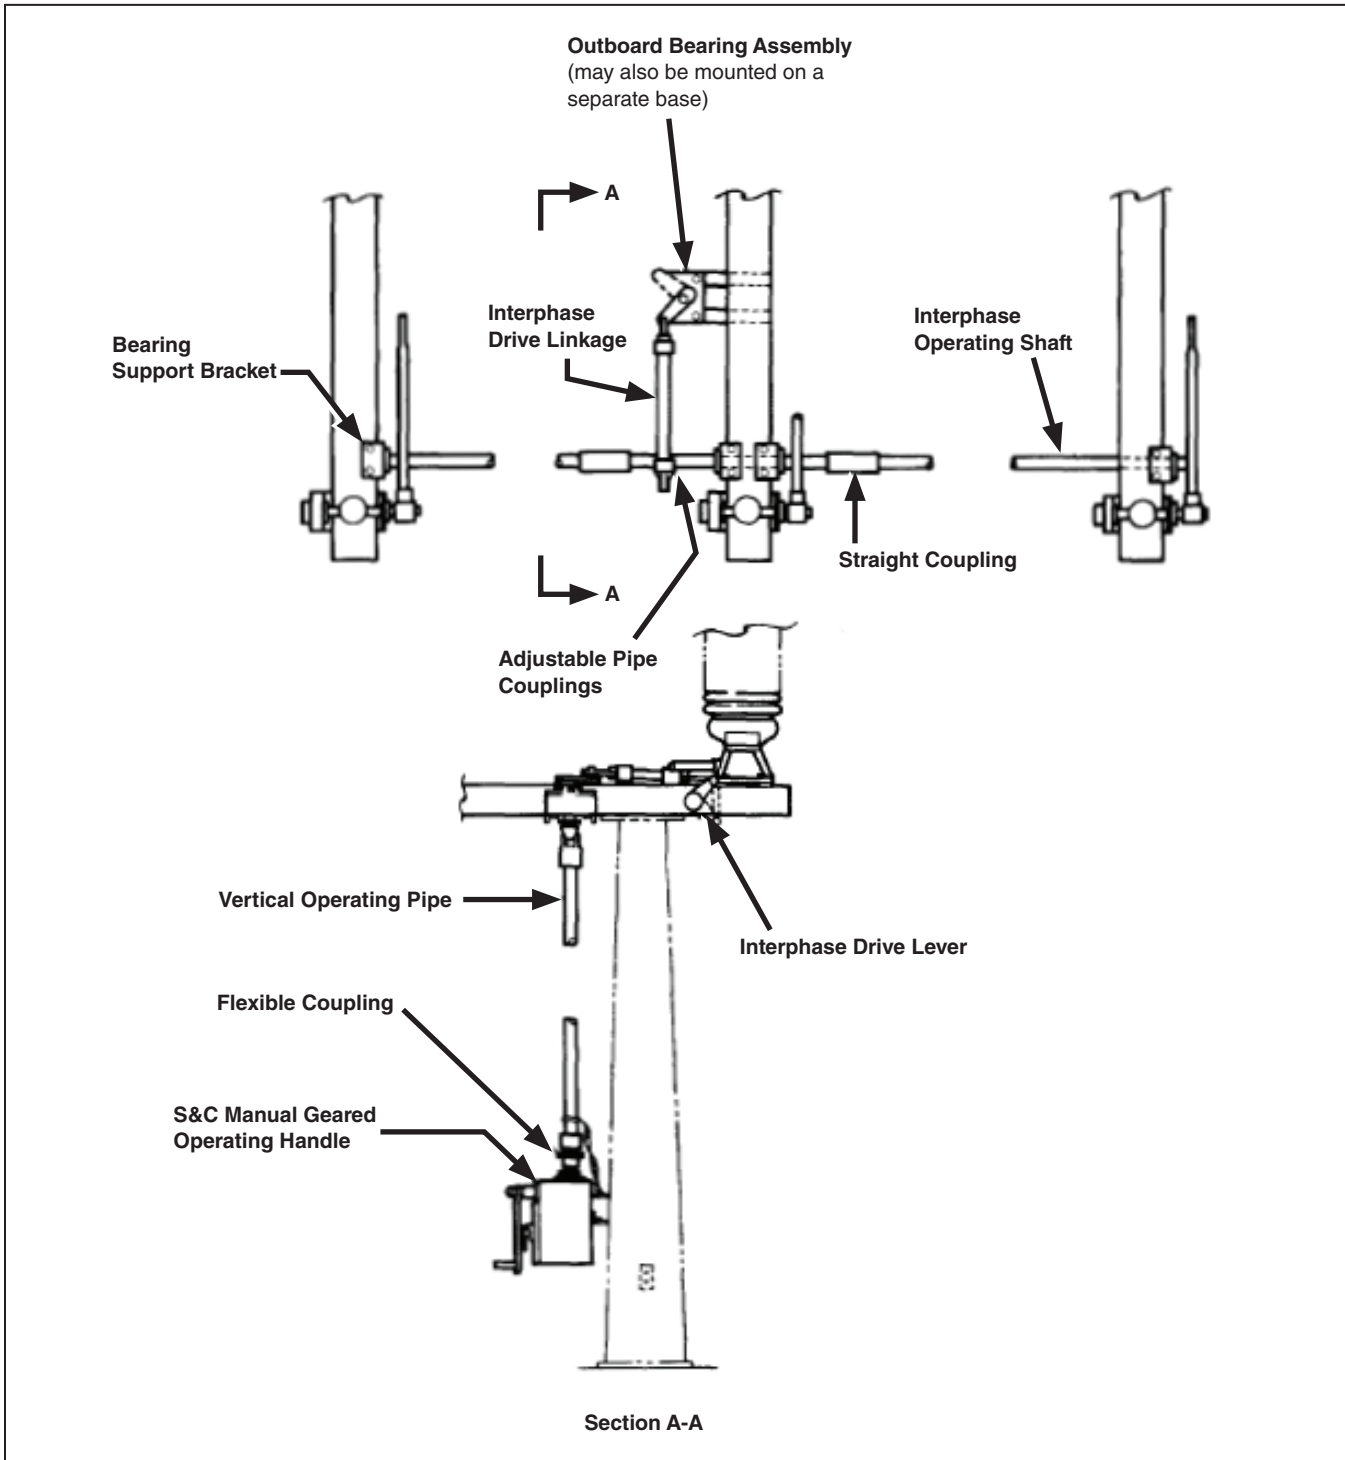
Typical grounding switch arrangement, shown for identification purposes. For the actual application refer to the erection drawing furnished.
